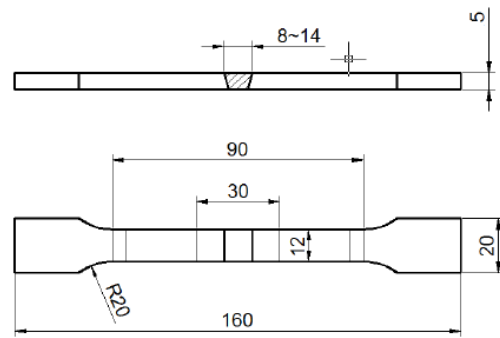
Dimension of non-standard tensile specimens(mm).
